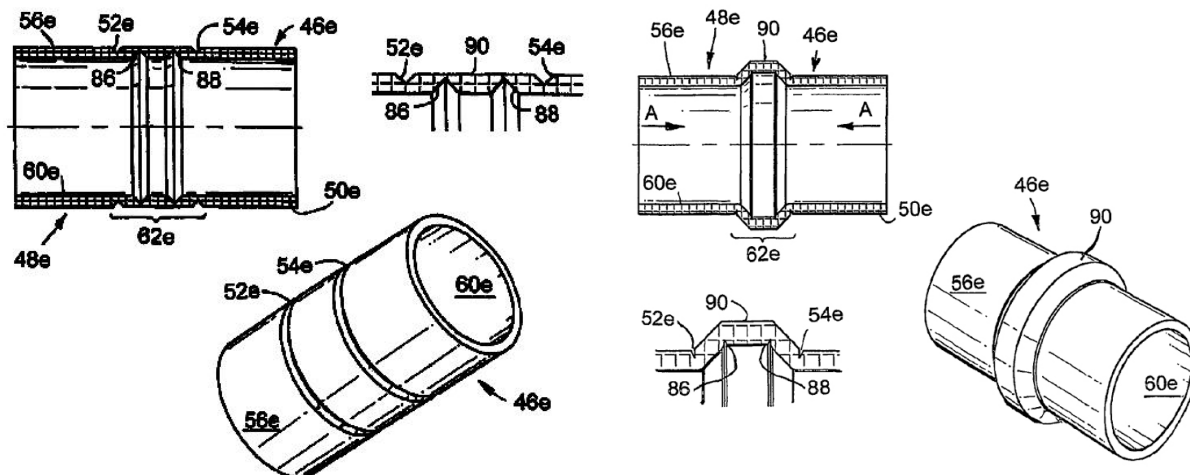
Alternative Design of Seal Element in Un-Deformed Position
